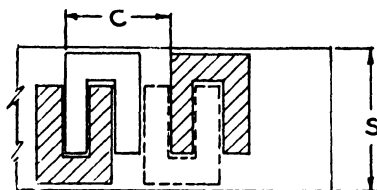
A layout for U-shaped blanks that utilizes 75 per cent of the strip.
